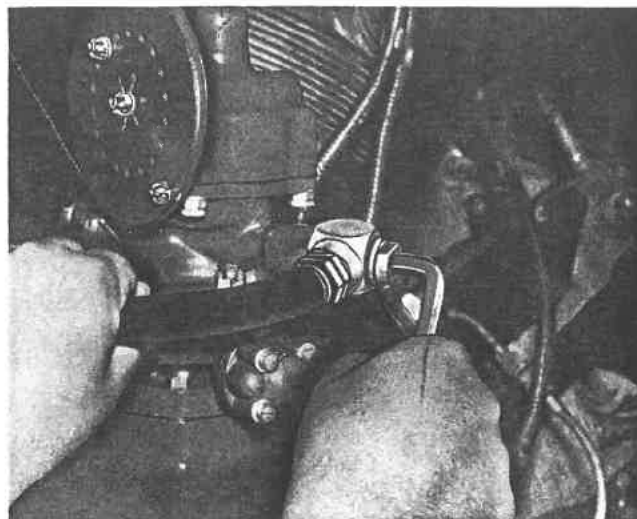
Tightening Feathering Line Swivel Clamp Bolt
